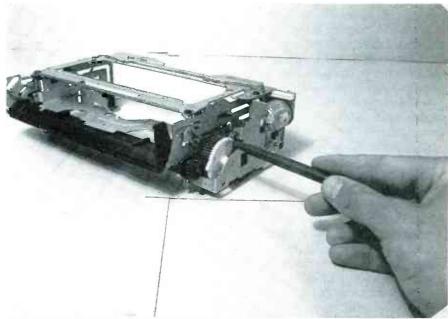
THE GEAR BLOCK AND MOTOR ASSEMBLY on the right side of the carriage is the drive system that accepts the cassette into a front-loading VCR.
